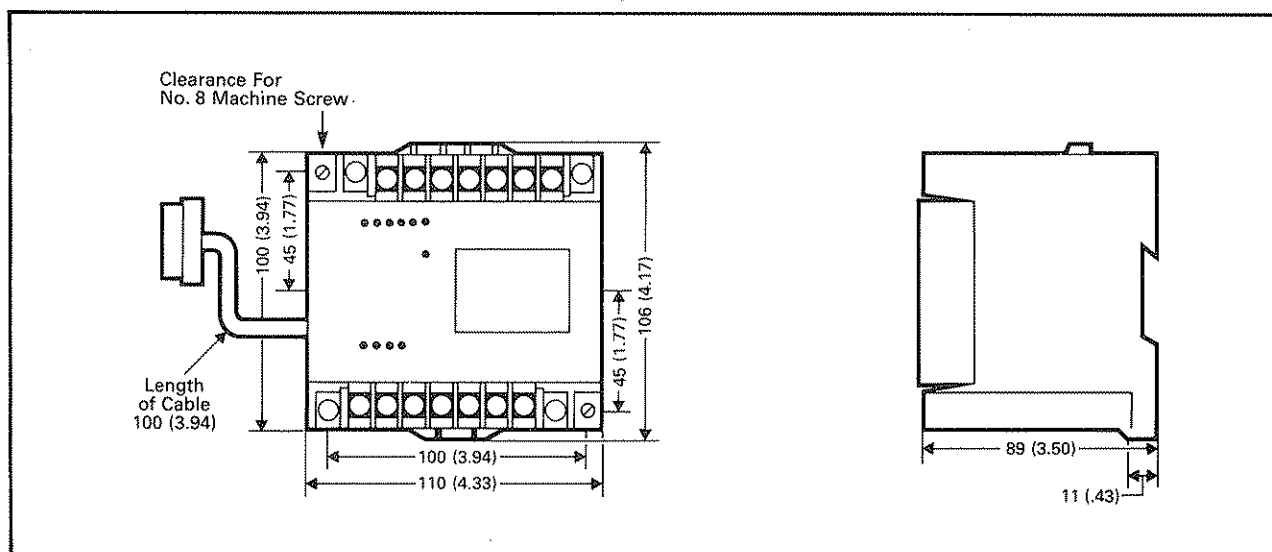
External Dimensions for PCE-101 I/O Expander in mm (in.)
